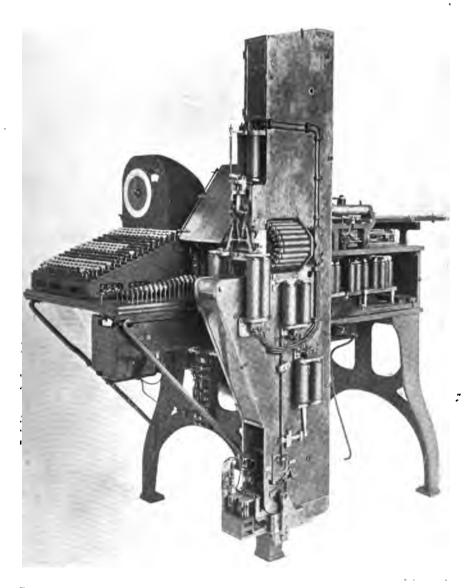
Graphotype (new model) composing and casting machine; view of right-hand side from the front. [To face page 408.
